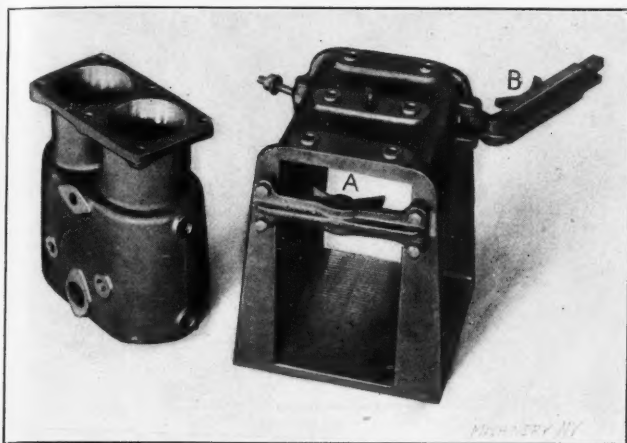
Jig for Drilling the Six Holes in the Flanges of the Cylinders which are used as Locating Holes in the Subsequent Operations
